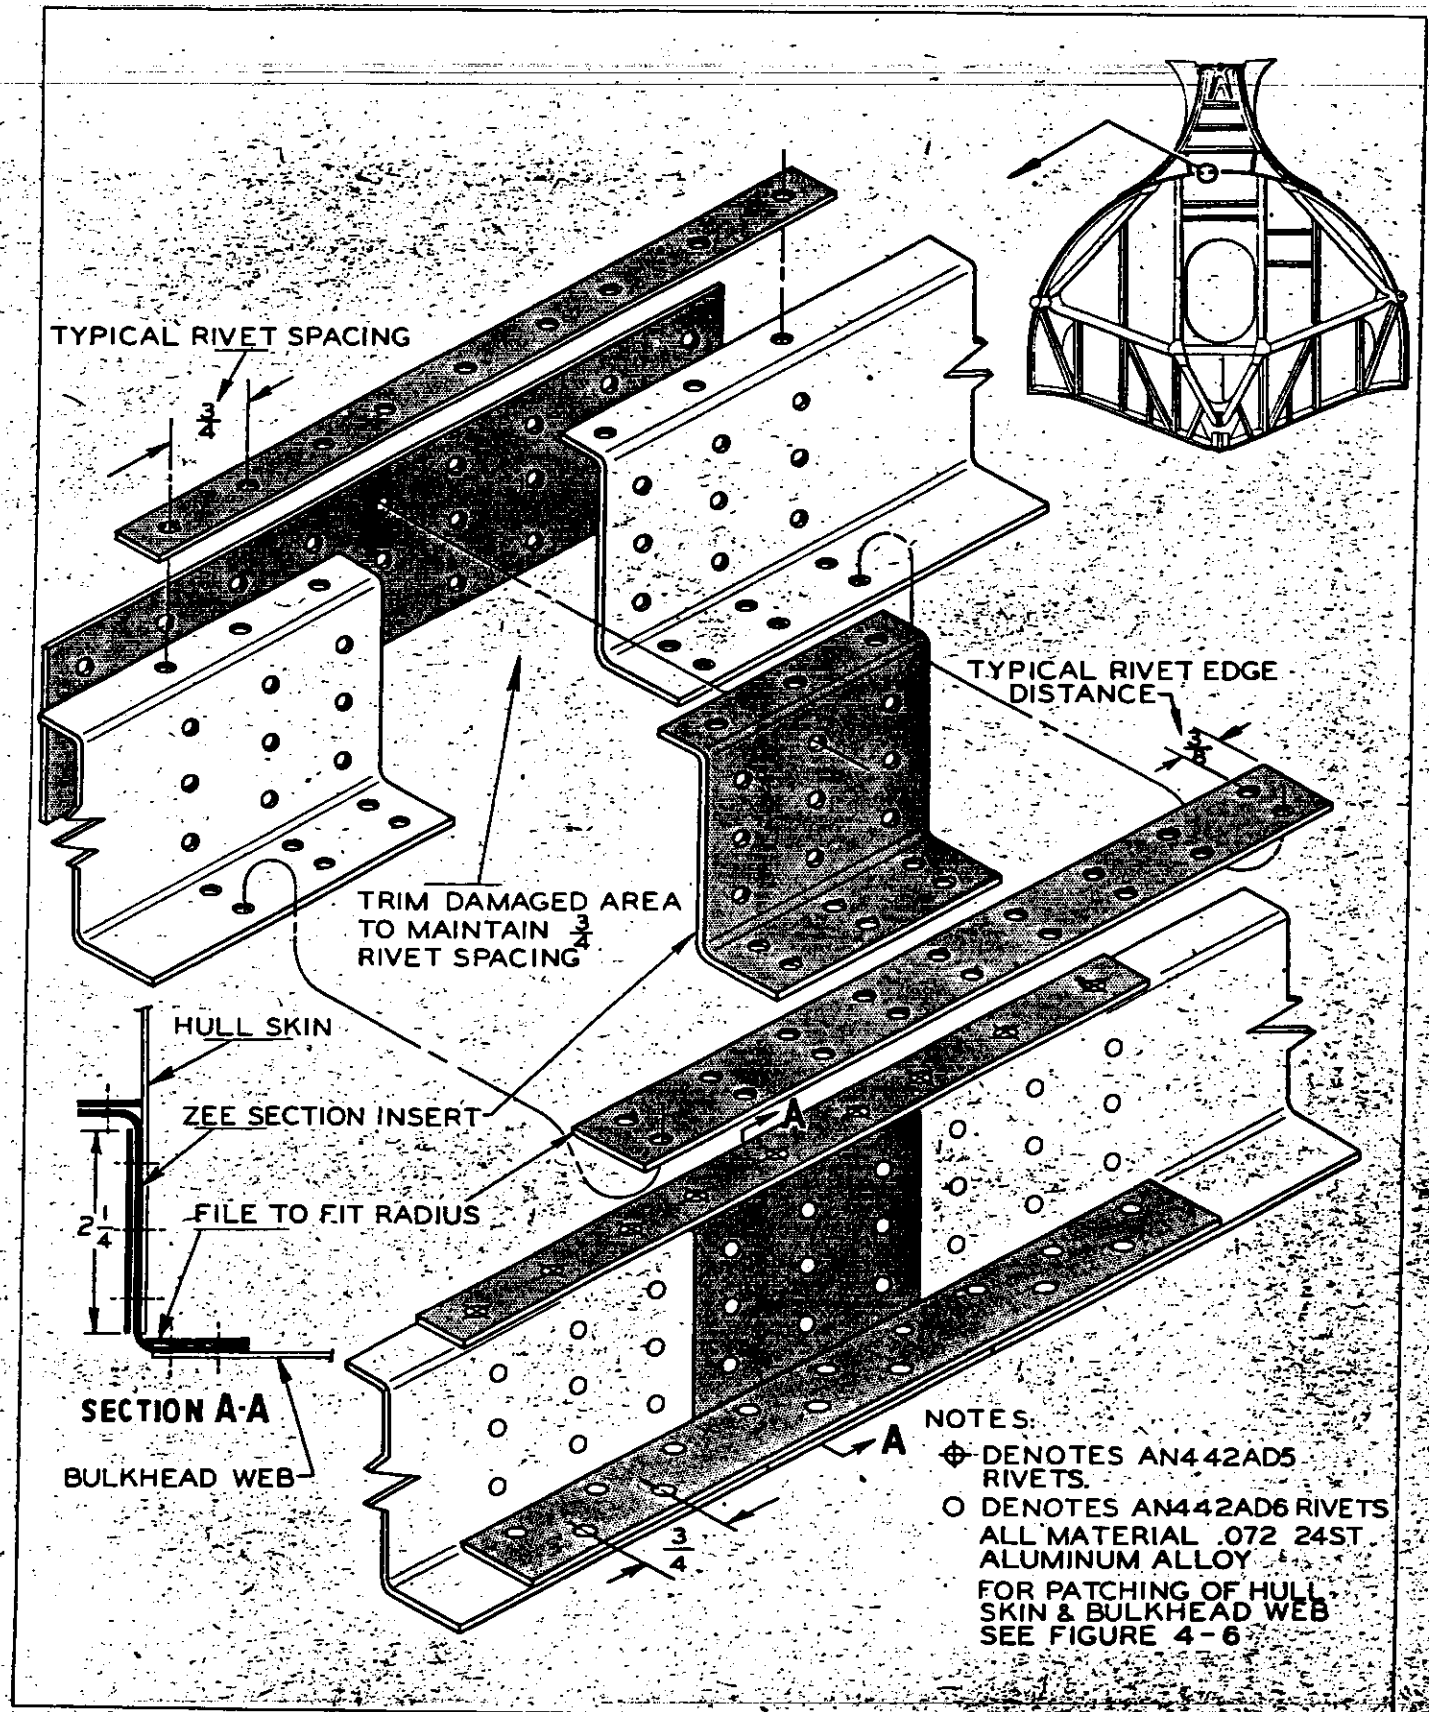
(Sheet 2 of 2 Sheets)—Bulkhead 4 Repairs
